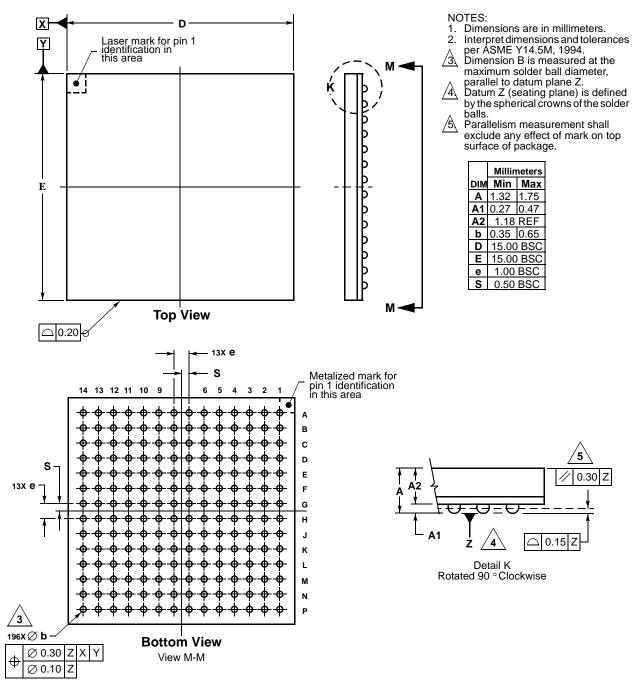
196 MAPBGA Package Dimensions (Case No. 1128A-01)
